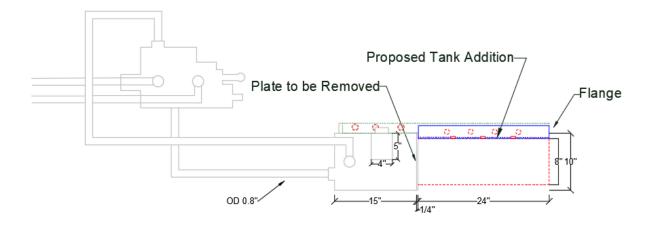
CAD drawing of proposed hydraulic reservoir via removal of side plate and addition of 8" x 24" x 4" tank with flanged side to fit against existing tank. An additional flange is added on top to support the weight of the new tank.
